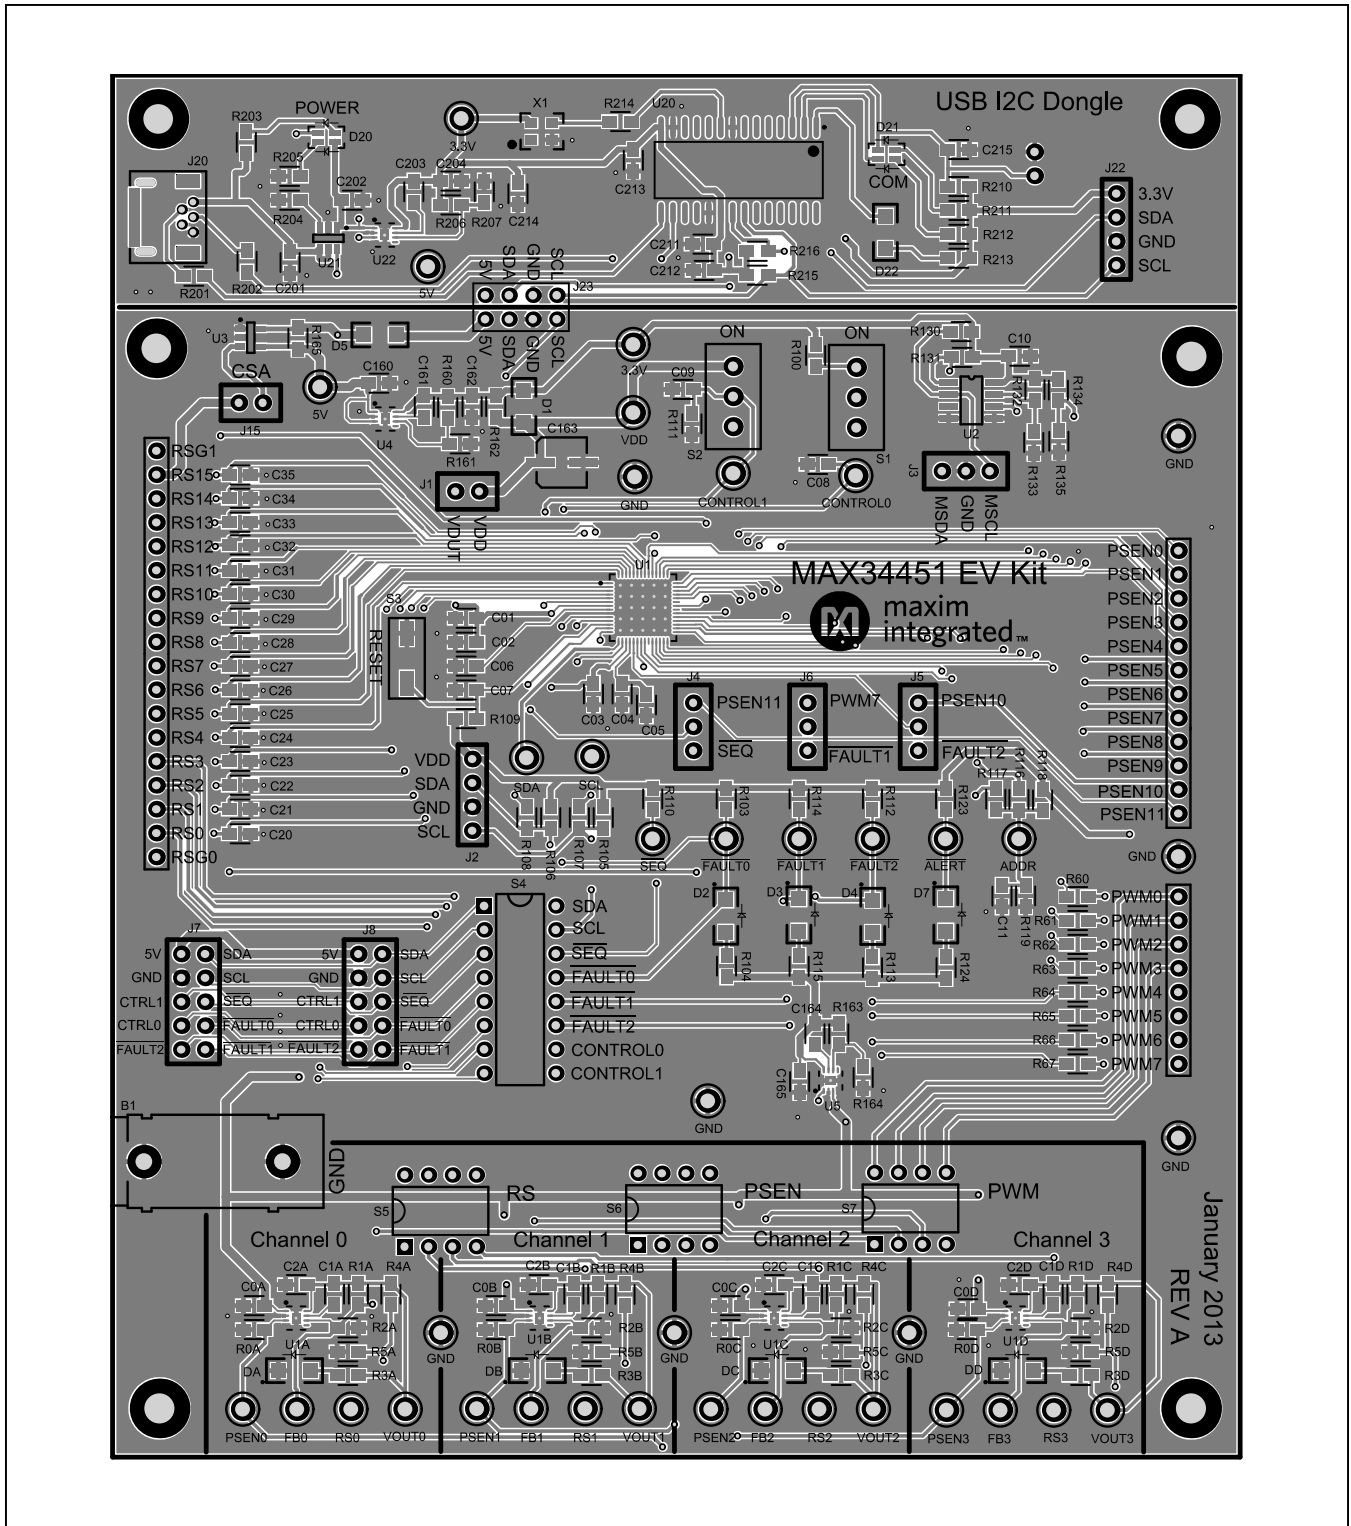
MAX34451 EV Kit PCB Layout—Top Layer
